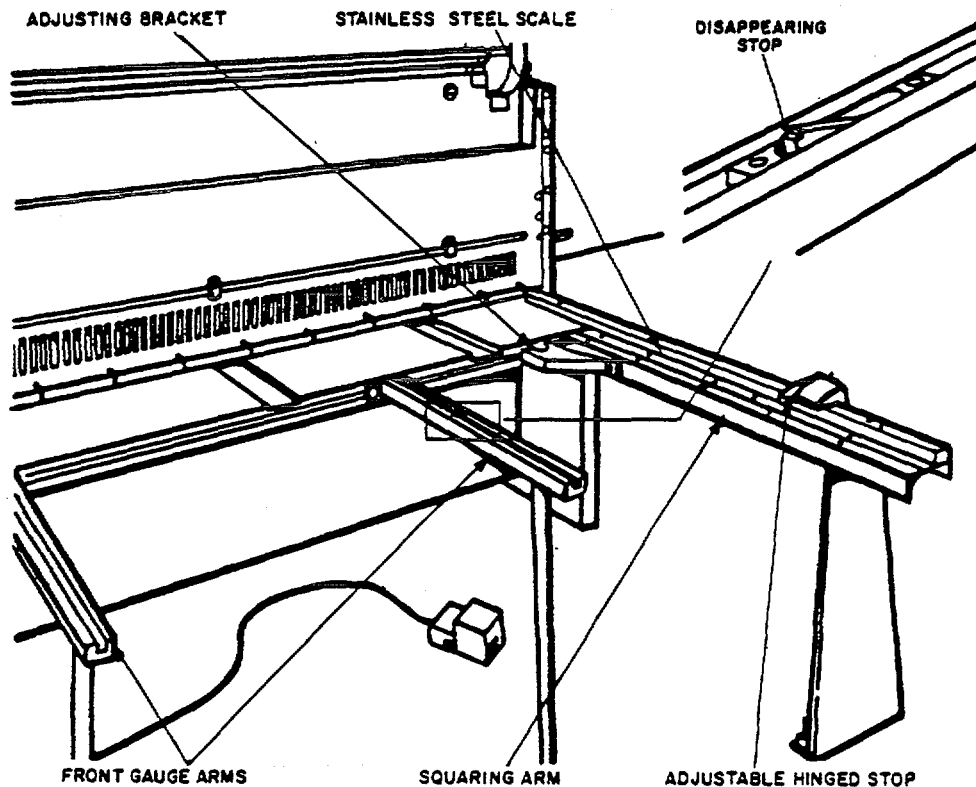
Using the Squaring Arm and Front Gauge Arm Equipped With Disappearing Stops
